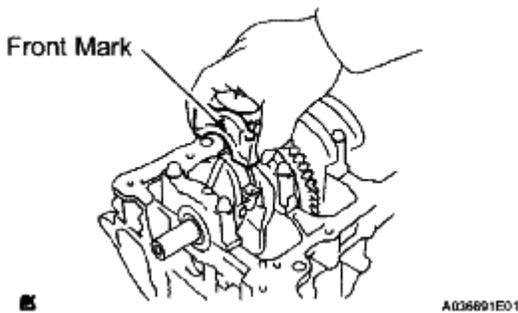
Checking Front Mark Of Connecting Rod Cap
